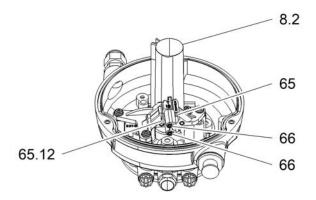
Pneumatic block (8.2) for max. 1 solenoid valve
